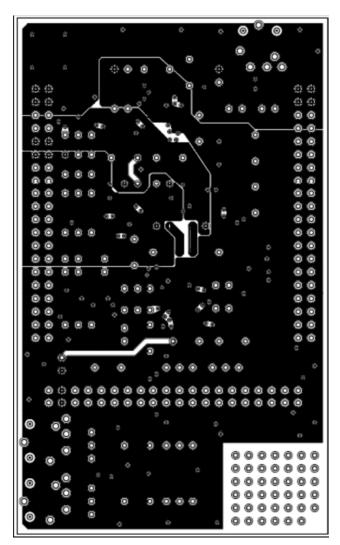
DEM-PCM1870RHF/1774RGP-A Board Layout—Inner Layer 3
